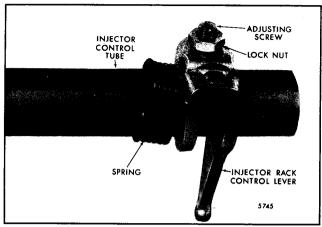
Injector Control Tube and Rack Lever (Spring-Loaded)
